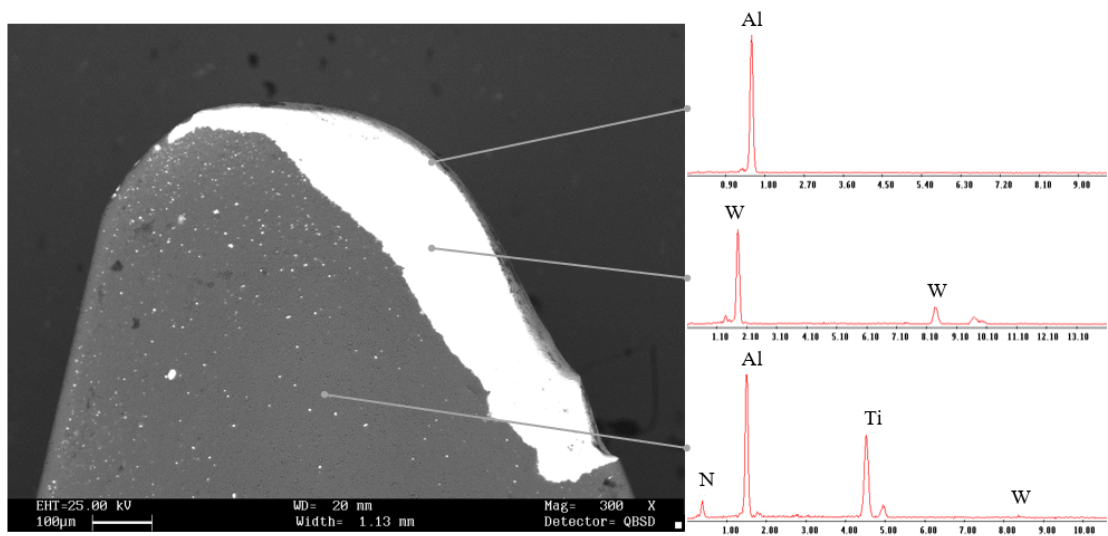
Tool after etching: feed of  $f = 0,06 \text{ mm rev}^{-1}$ , cutting speed of  $V_c = 120 \text{ m min}^{-1}$  and material removal of  $MR = 660 \text{ mm}^3$  using ultrasonic vibration assisted turning
